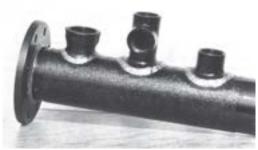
Centrifugally cast pipe of ductile cast iron with welded flange and branches; an application for house connections of gas and water supplies as well as for intake shafts
